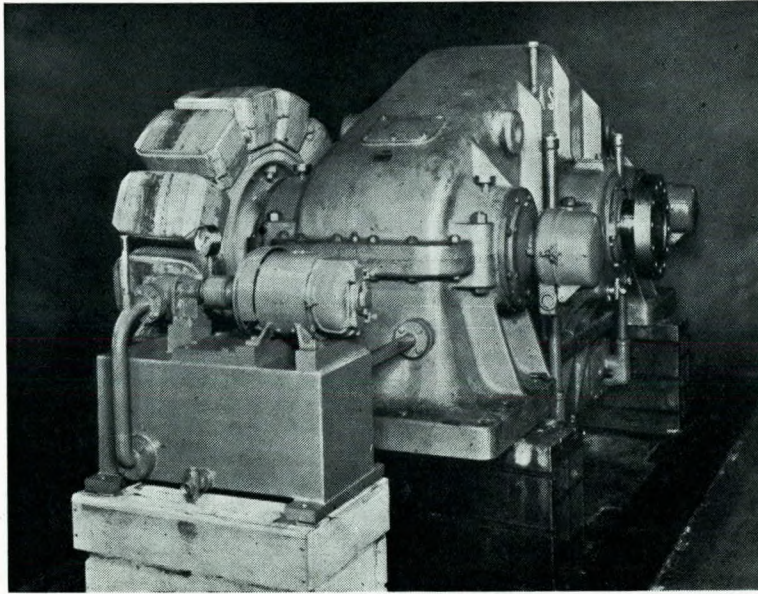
Detailed view of reduction gearing and primary part of the coupling fitted in the m.s. "Astri".
